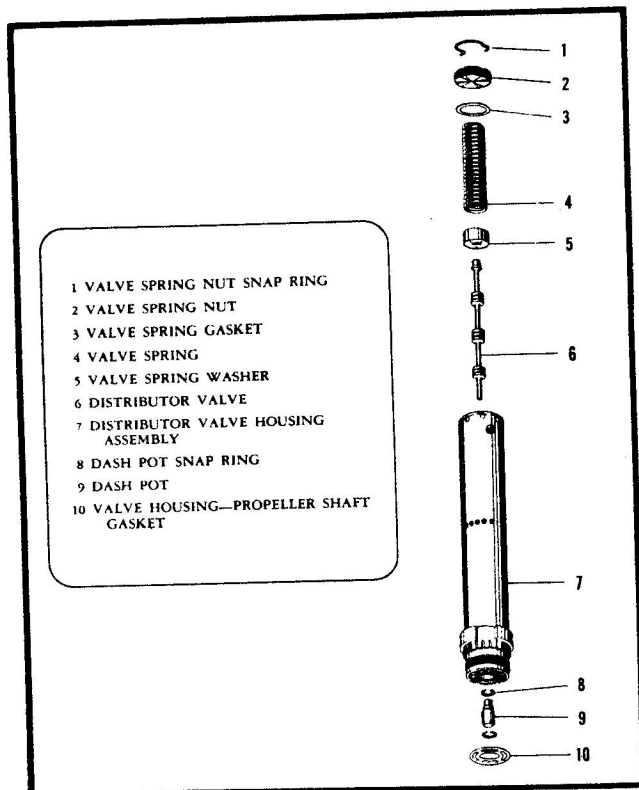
Distributor Valve Assembly for Models 22D30 and 22D40
